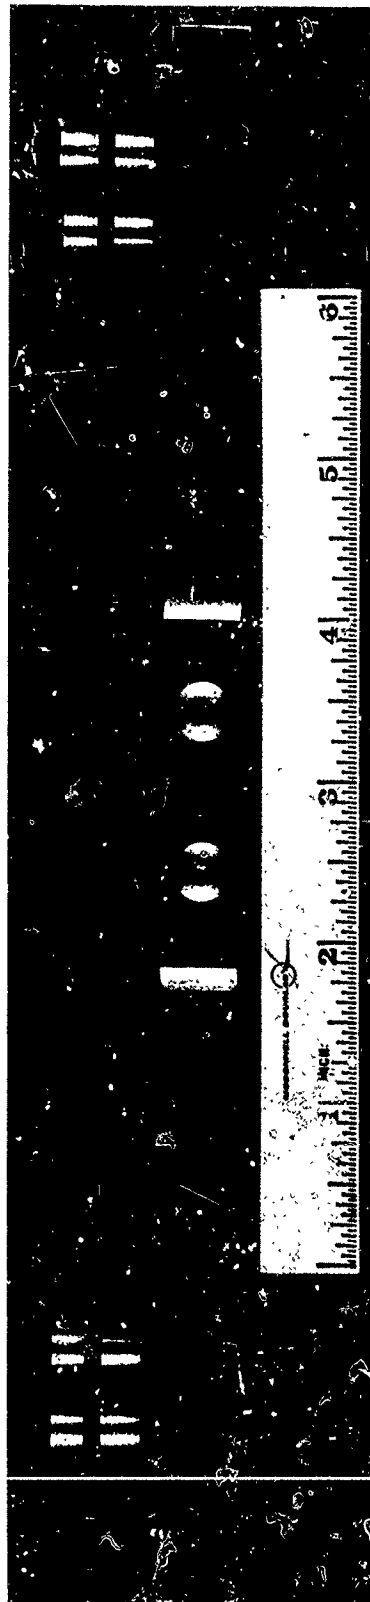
Tensile Specimen and Jig for Doubler Bonding
